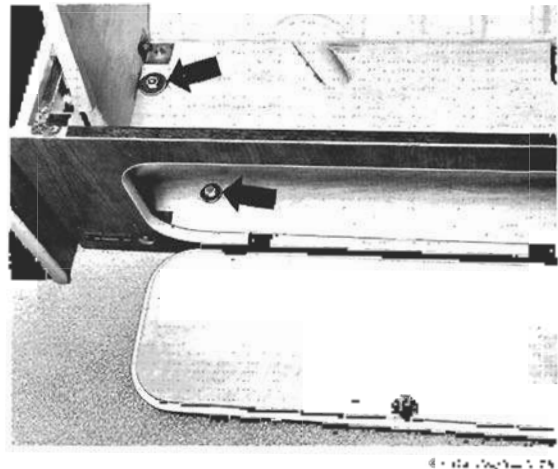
Nuts and bolts that hold cabinet to floor.
